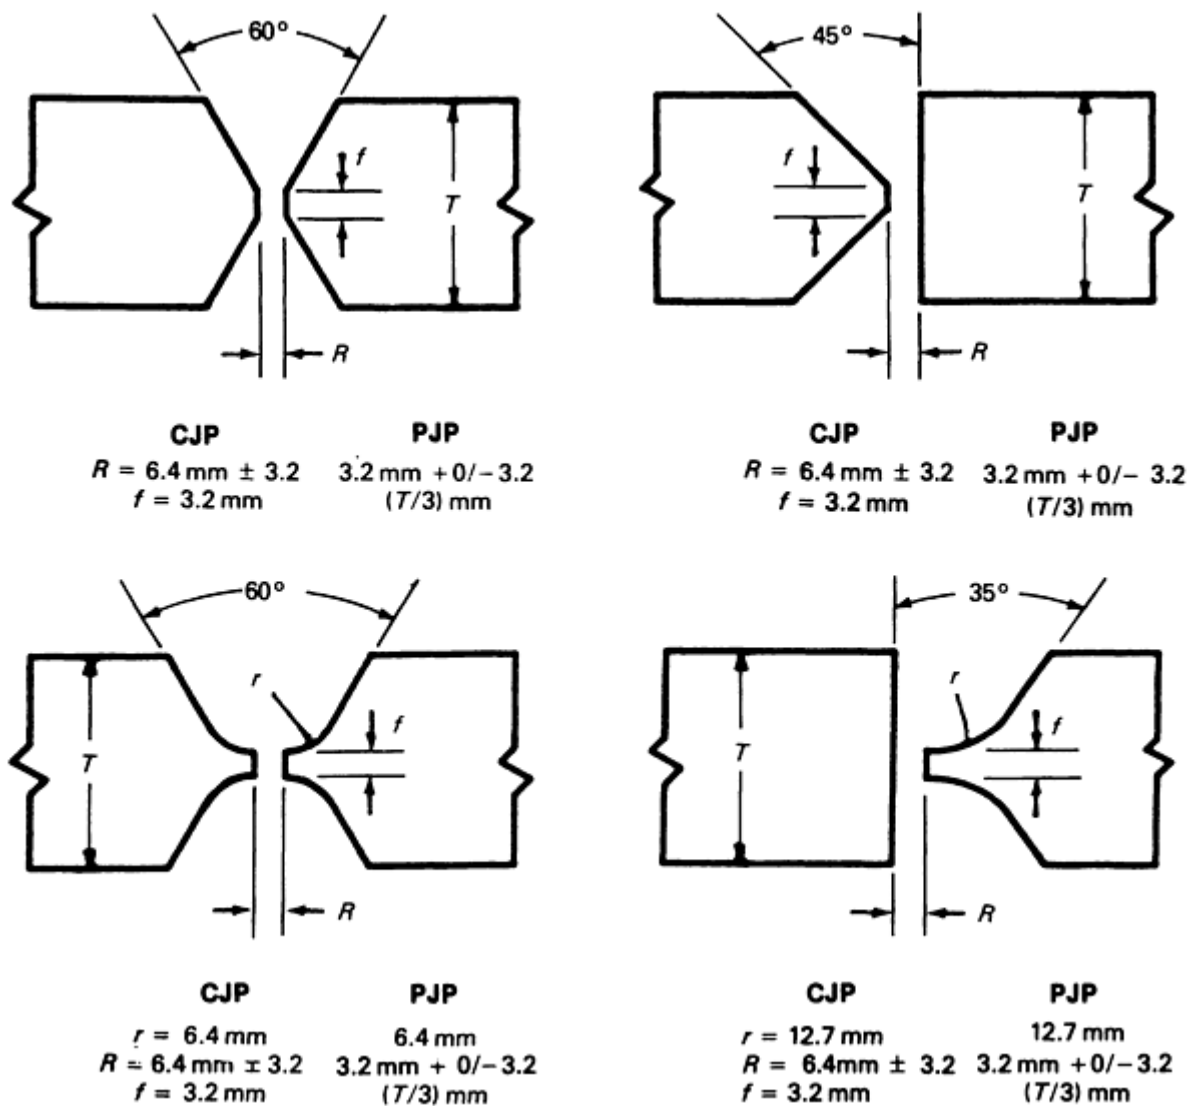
RECOMMENDED DIMENSIONS FOR COMPLETE JOINT PENETRATION (CJP) AND PARTIAL JOINT PENETRATION (PJP) GROOVES. SOURCE: REF 1
